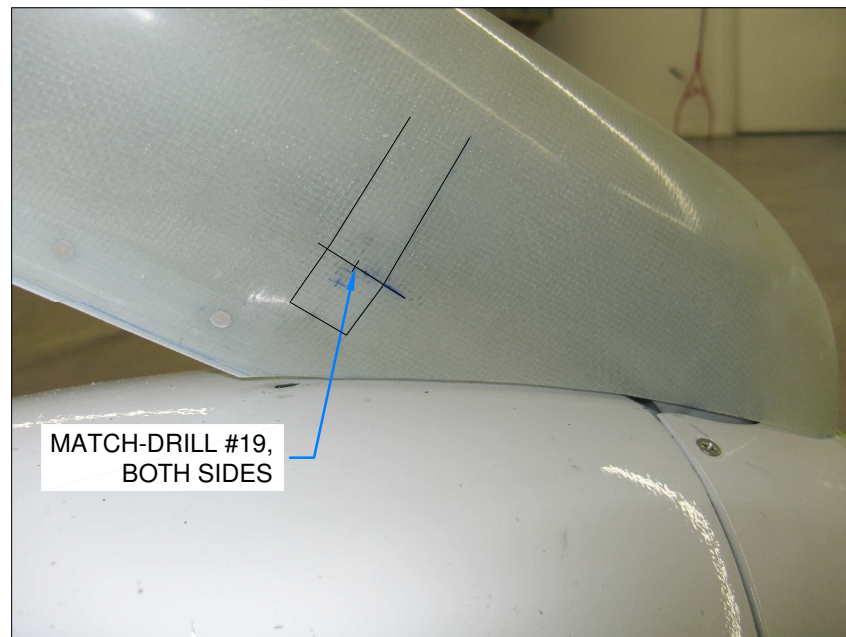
DRILL THE NOSE GEAR LEG FAIRING
